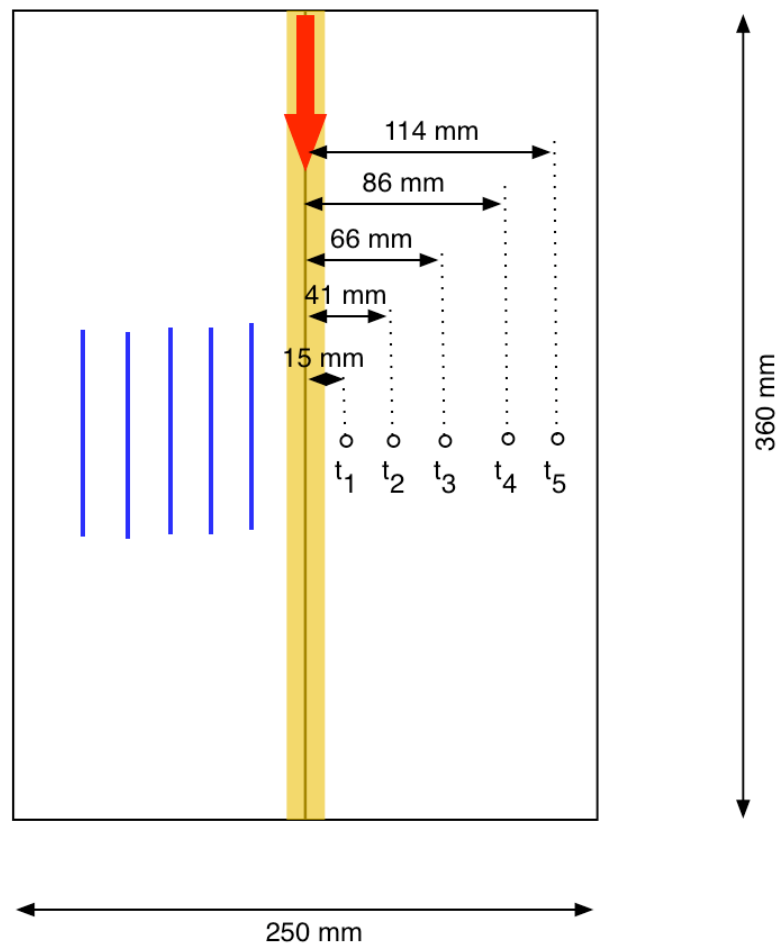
instrumentation scheme for the first instrumented MIG welding test
